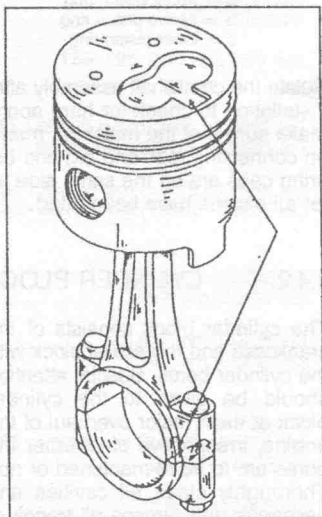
Correct assembly of pistons and connecting rods.
